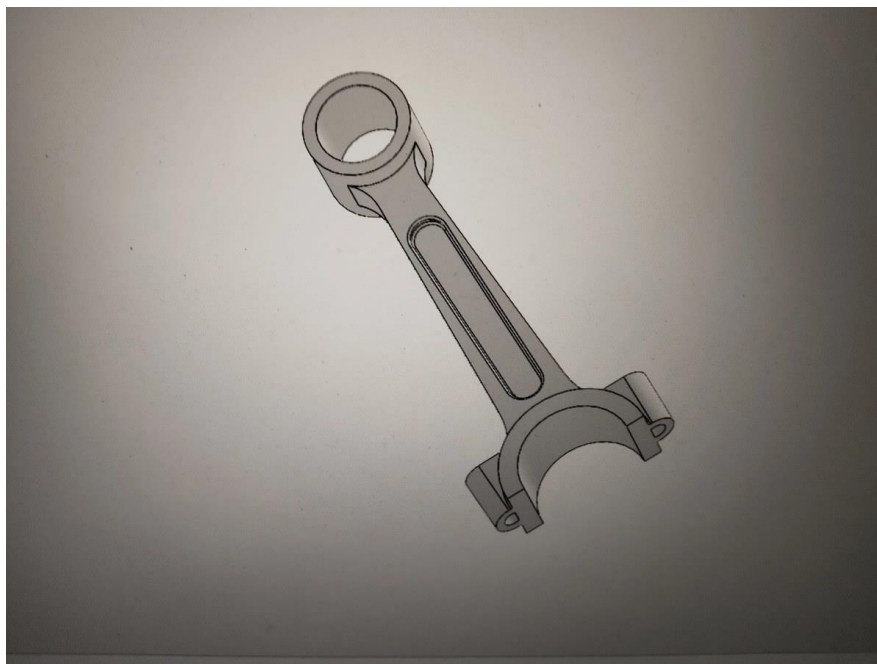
SolidWorks model, isometric view showing full rod geometry
